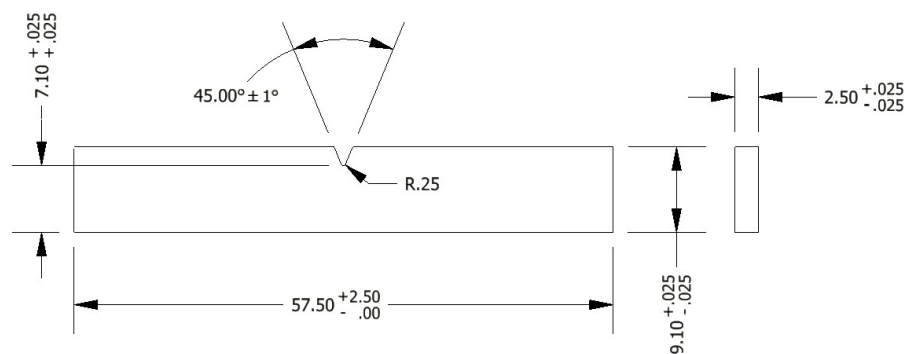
Drawing of sub sized Charpy sample used in the impact test ¹²⁸.
